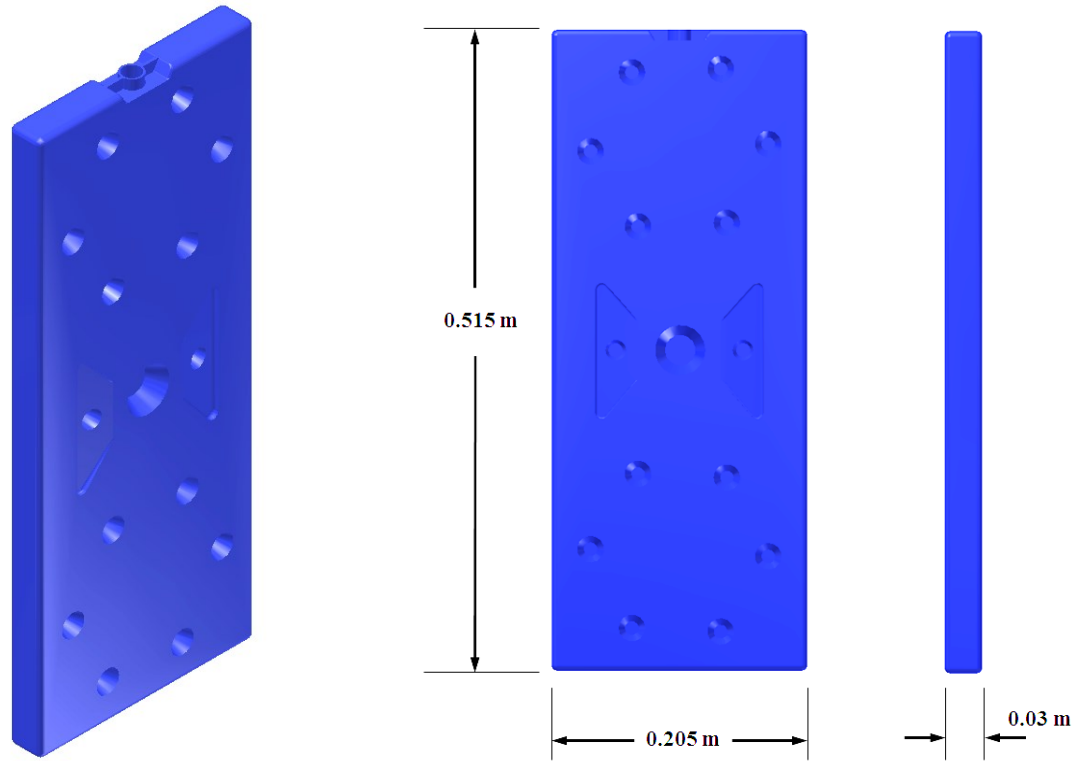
Schematic of the PCM container demonstrating basic dimensions.
